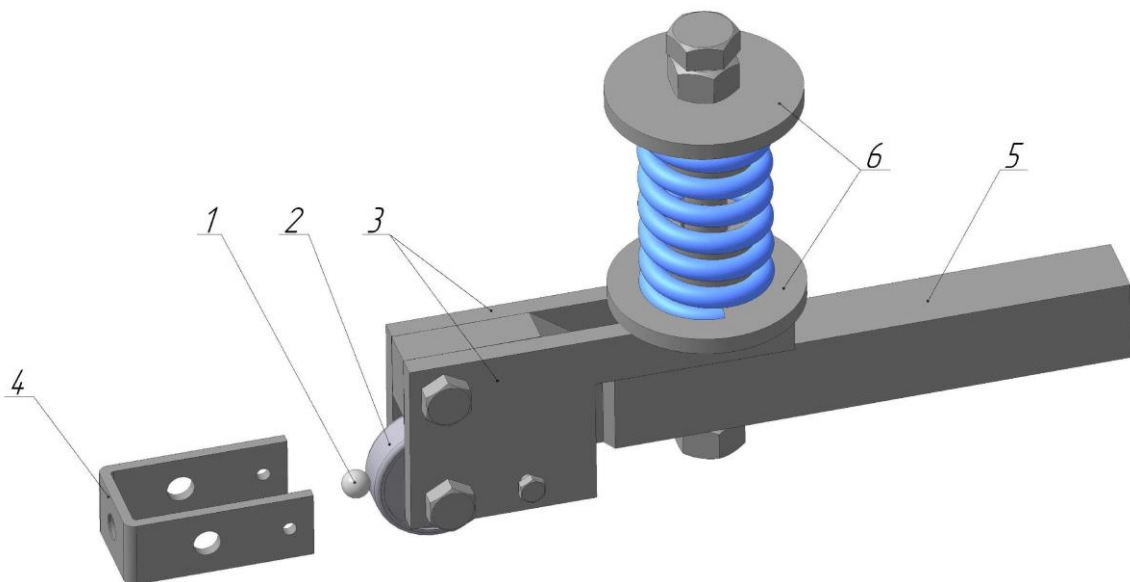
Three-dimensional model diagram of the device for break-ball \varnothing 10mm, authors: 1 - ball; 2 - bearing; 3 - leverage; 4 - holder; 5 - corps; 6 – washers / Тривимірна модель-схема пристрою для обточування кулькою \varnothing 10мм, авторська розробка: 1 – кулька; 2 – підшипник; 3 – важелі; 4 – тримач; 5 – корпус; 6 - шайби
